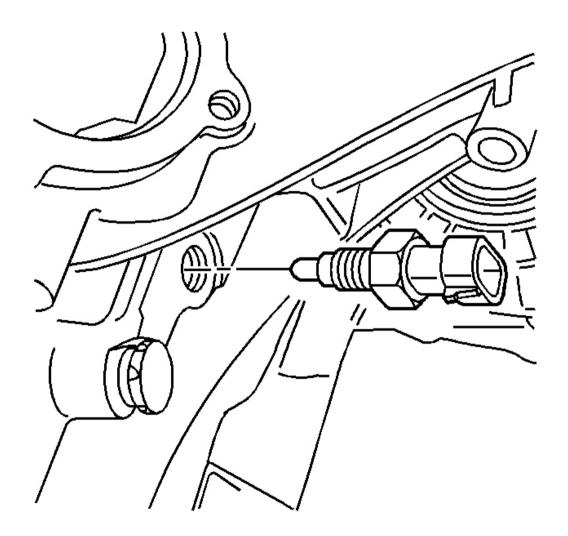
Backup Lamp Switch Courtesy of GENERAL MOTORS CORP.
